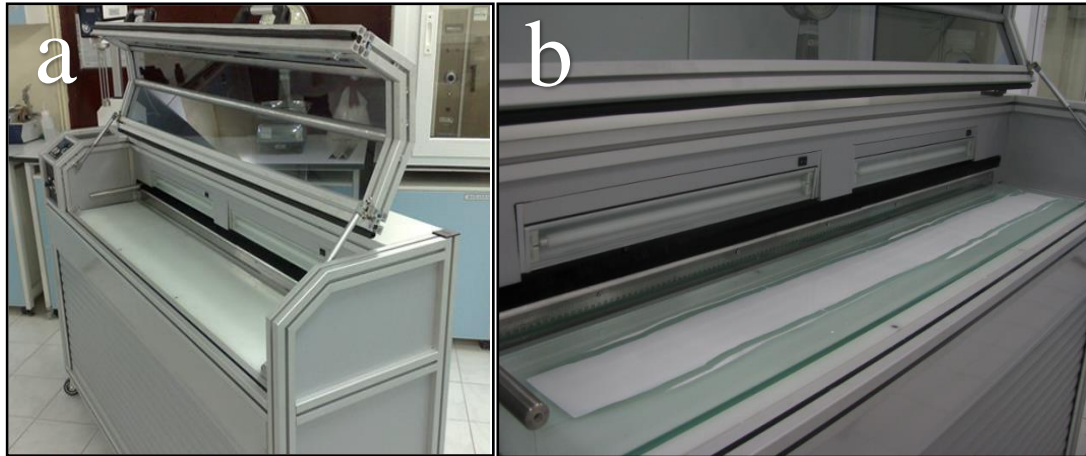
MSE TC-0901AL a)Tape Casting Device and b)Casting Example.
